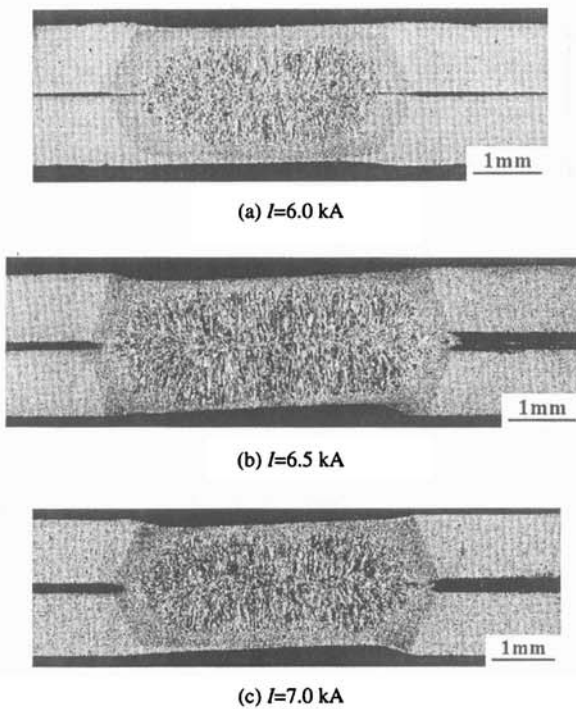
Macrostructures of welds in 0-40-100
